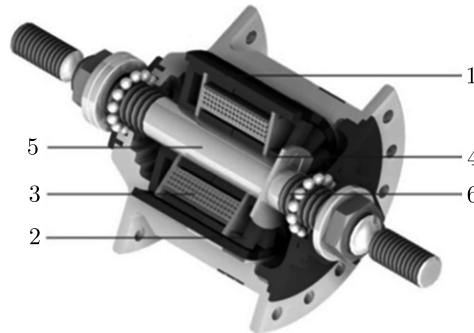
Structure of the generator: 1 – magnets, 2 – frames, 3 – coil, 4 – carcass, 5 – shaft, 6 – bearing
